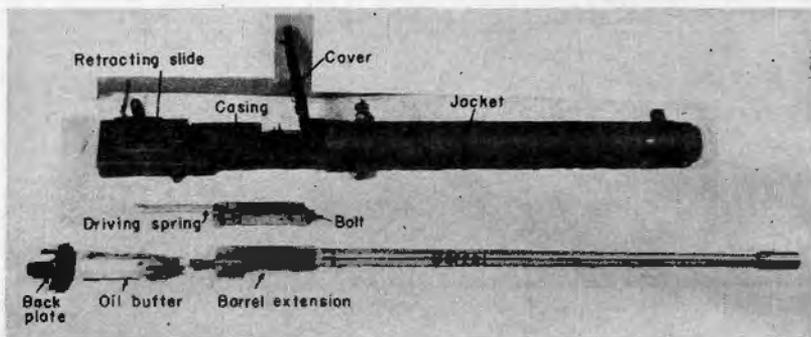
Principal parts of caliber .50 machine gun, M2.
